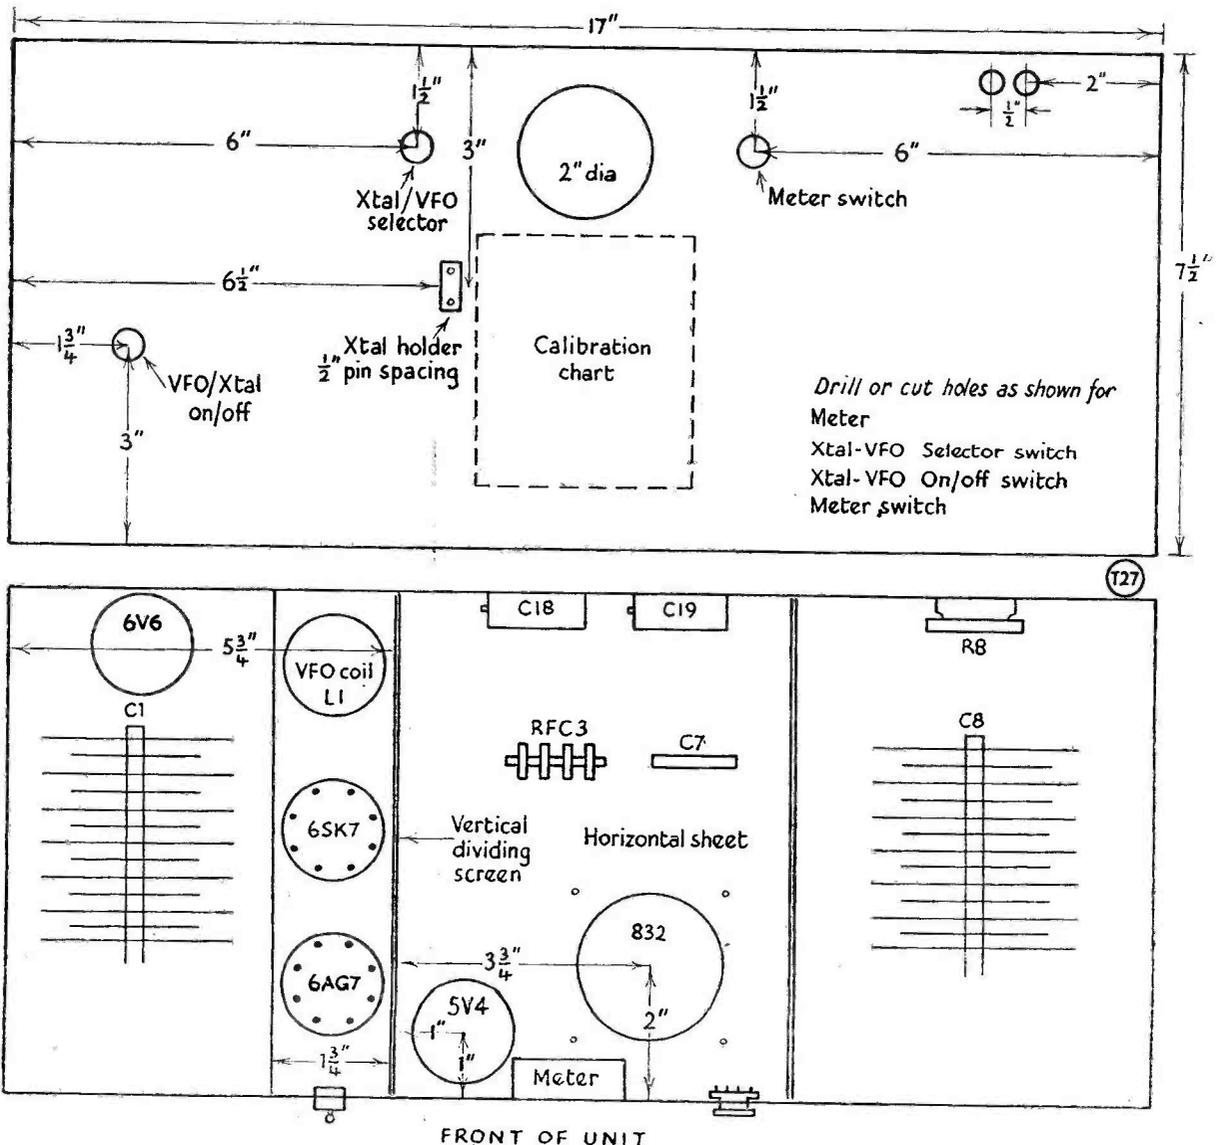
Further constructional details and placing of components. This is a front-panel and top-chassis view and is not to scale.
